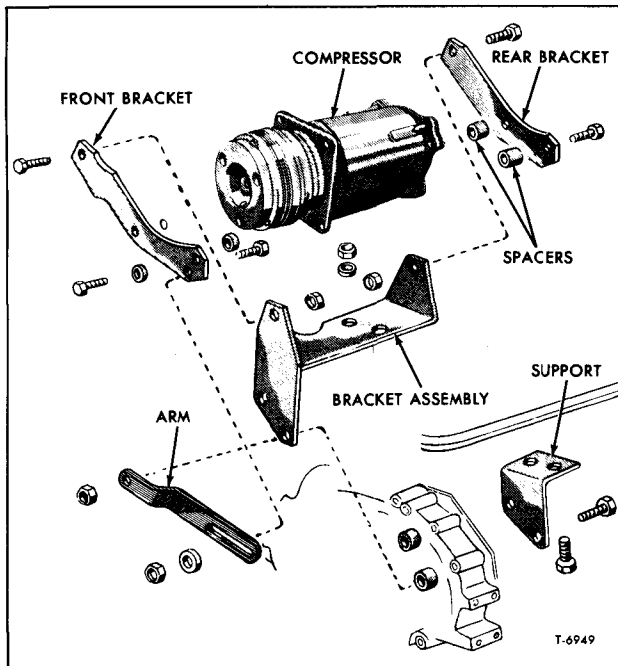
Compressor Mounting (6-71 Alum. Tilt Cab Model)
